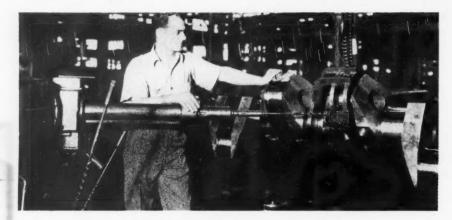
A one-half inch oil hole is drilled at a 45-degree angle in each crankshaft "pin" to provide for lubrication of the connecting rod bearing and wristpin, also for piston cooling.
